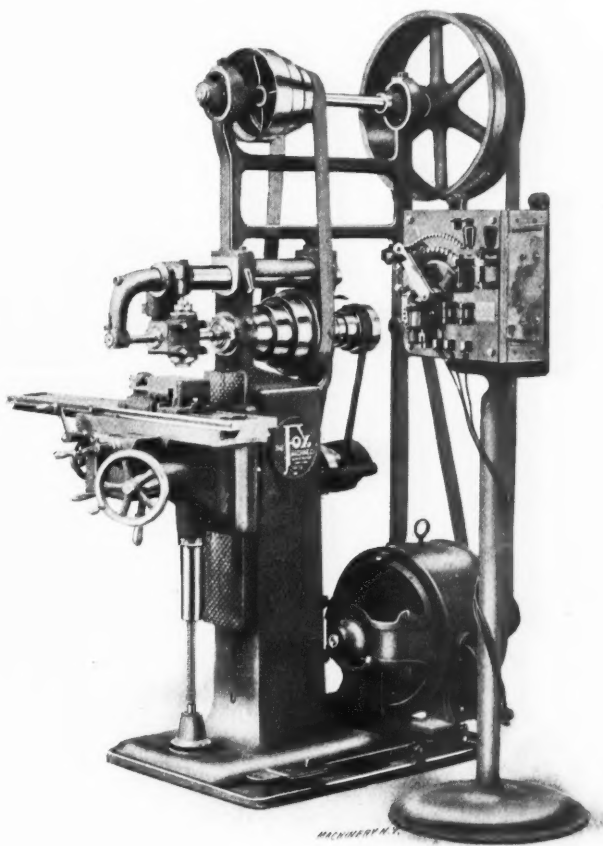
The No. 31-2 Fox Light Miller, arranged for Motor Drive.
